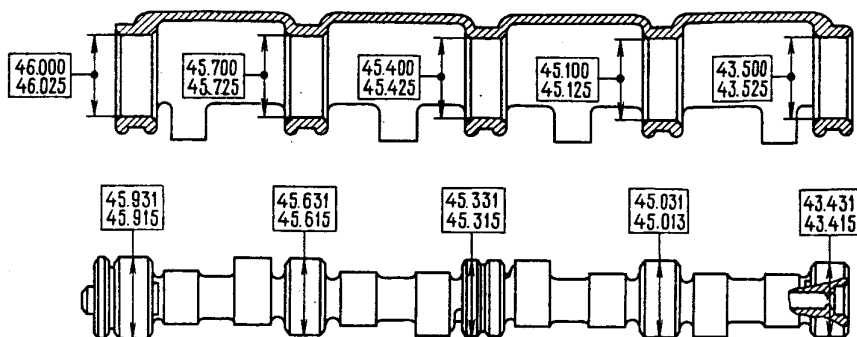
Main Dimensions of Camshaft and of Bores in Camshaft Bearing Housing
